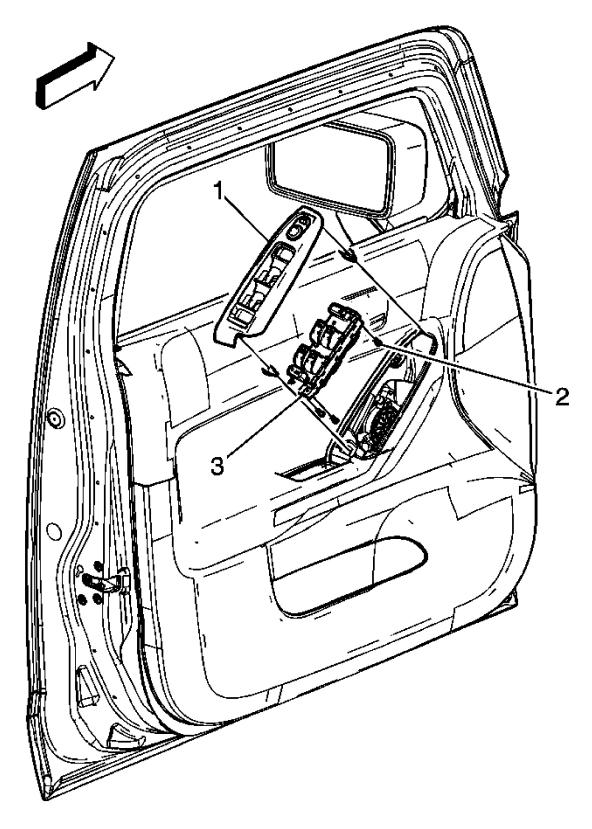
View Of Driver Side Door Lock/Side Window Switch
